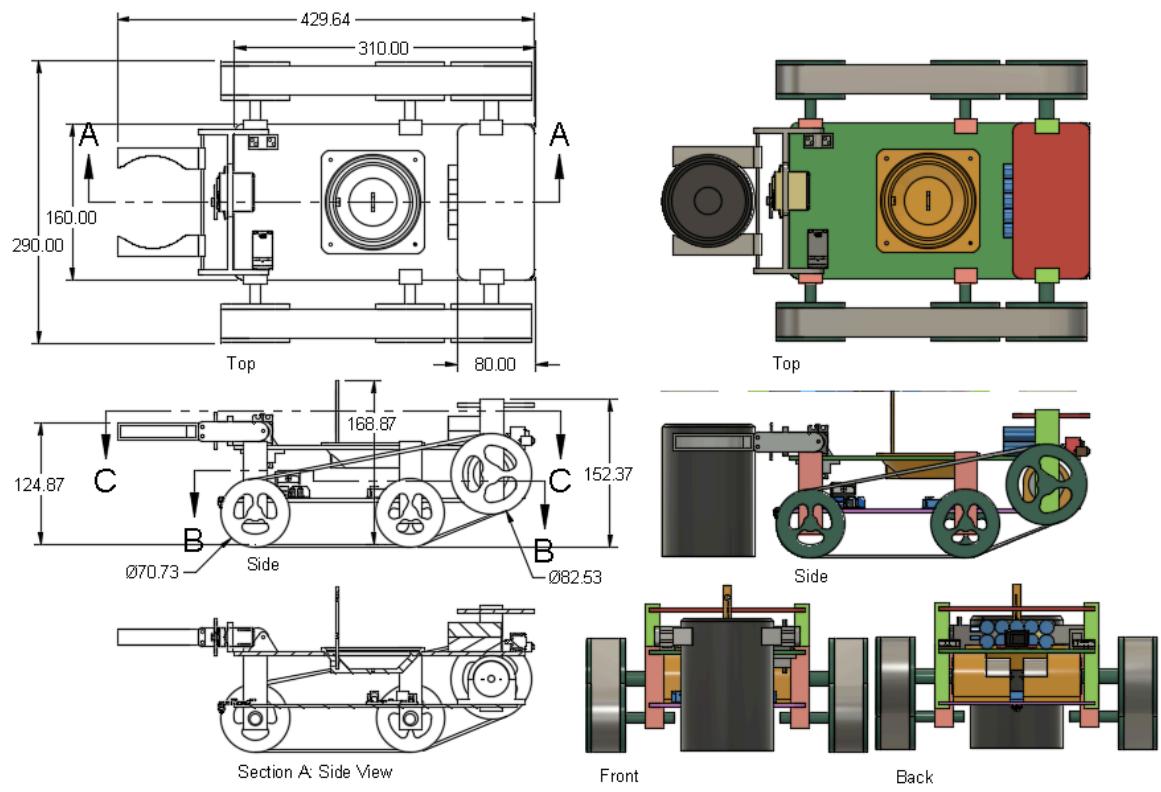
Chassis Overall Dimensions, Color CAD Images (with pylon mockup for reference)
